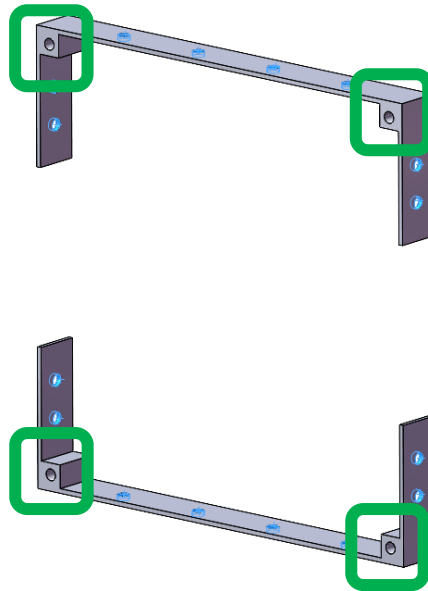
Mounting bracket showing attachment point locations. Mounting bracket to duct are in blue and mounting bracket to modular damper assembly in green.
